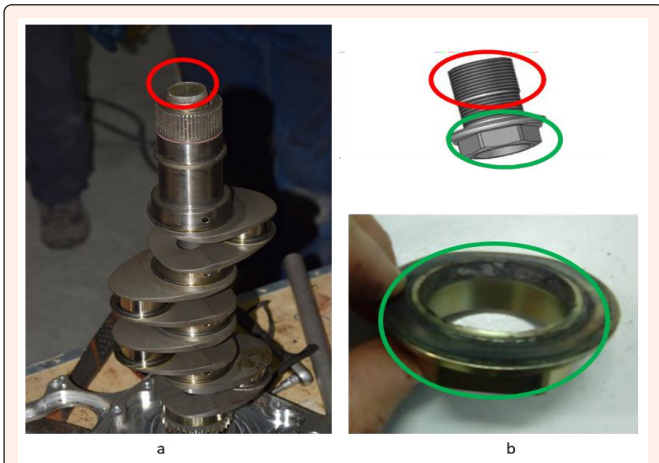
Fracture surface of the central bolt: a) shaft side; b) propeller side.
